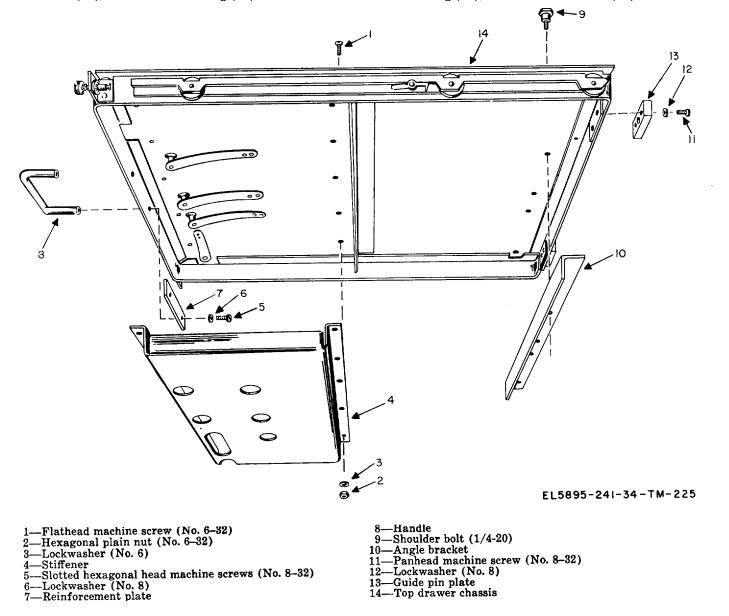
Top drawer chassis (part of OA-2055/FSW-8), exploded view.
